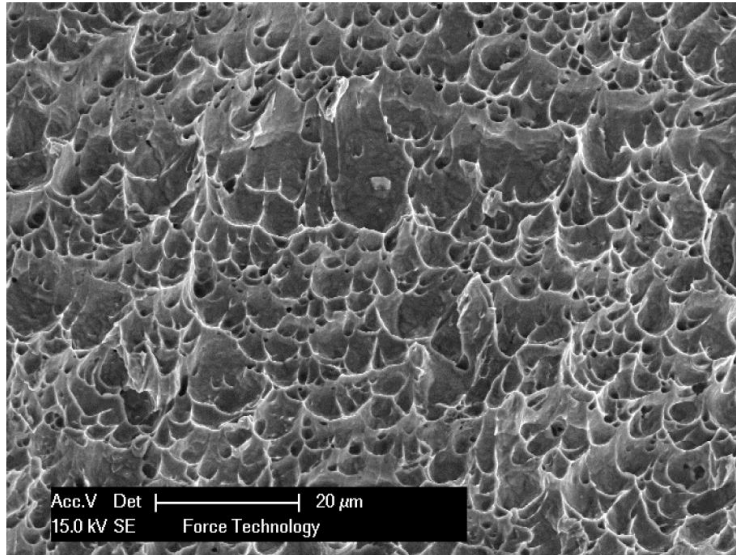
SEM micrograph of nose wheel steering fork left side fracture surface displaying ductile fracture confirmed by shear dimples.
